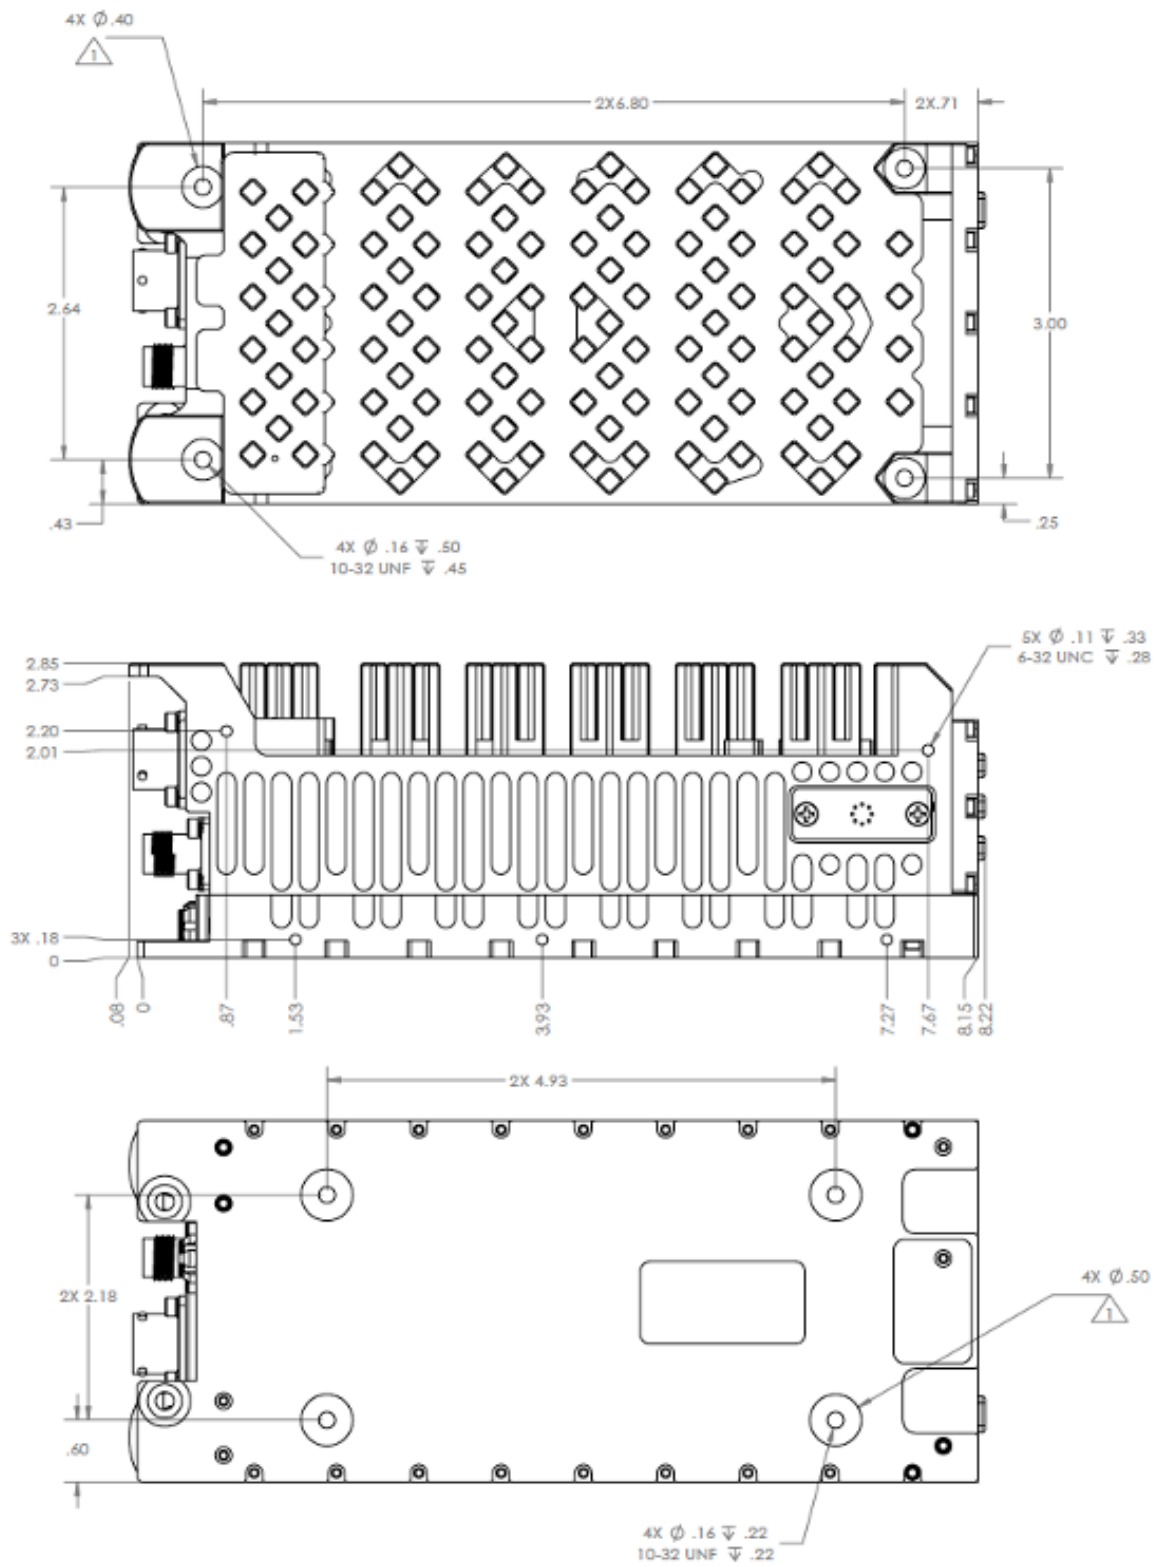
TCR-U/L-50 Outline Drawing (cont.)
